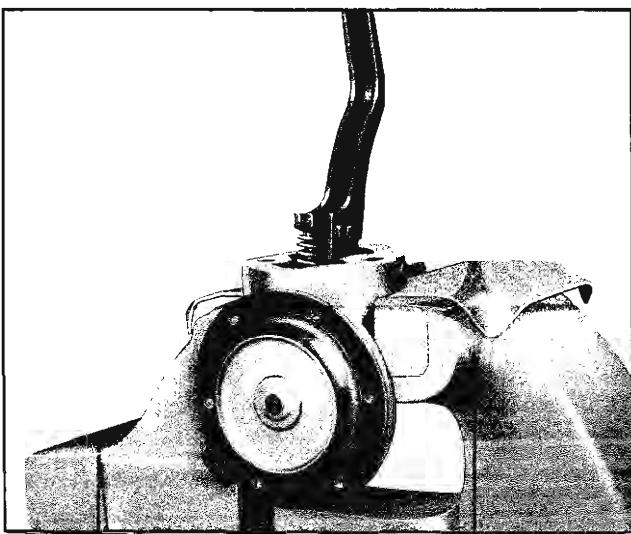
B-131 Diaphragm Assembly Installed (4 Cyl.)
